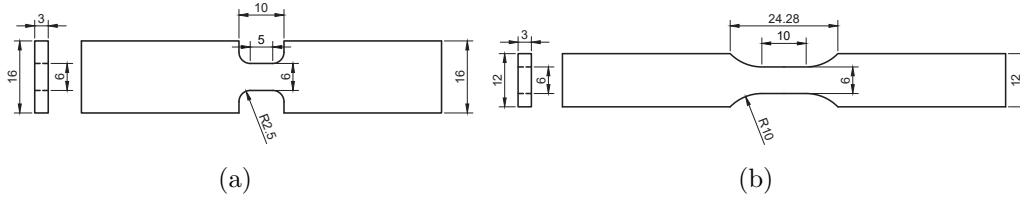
Dimension of specimen (in mm). (a) short specimen with 5 mm gauge section for both quasi-static tests and dynamic tests, (b) long specimen with 10 mm gauge section for dynamic tensile failure tests.
